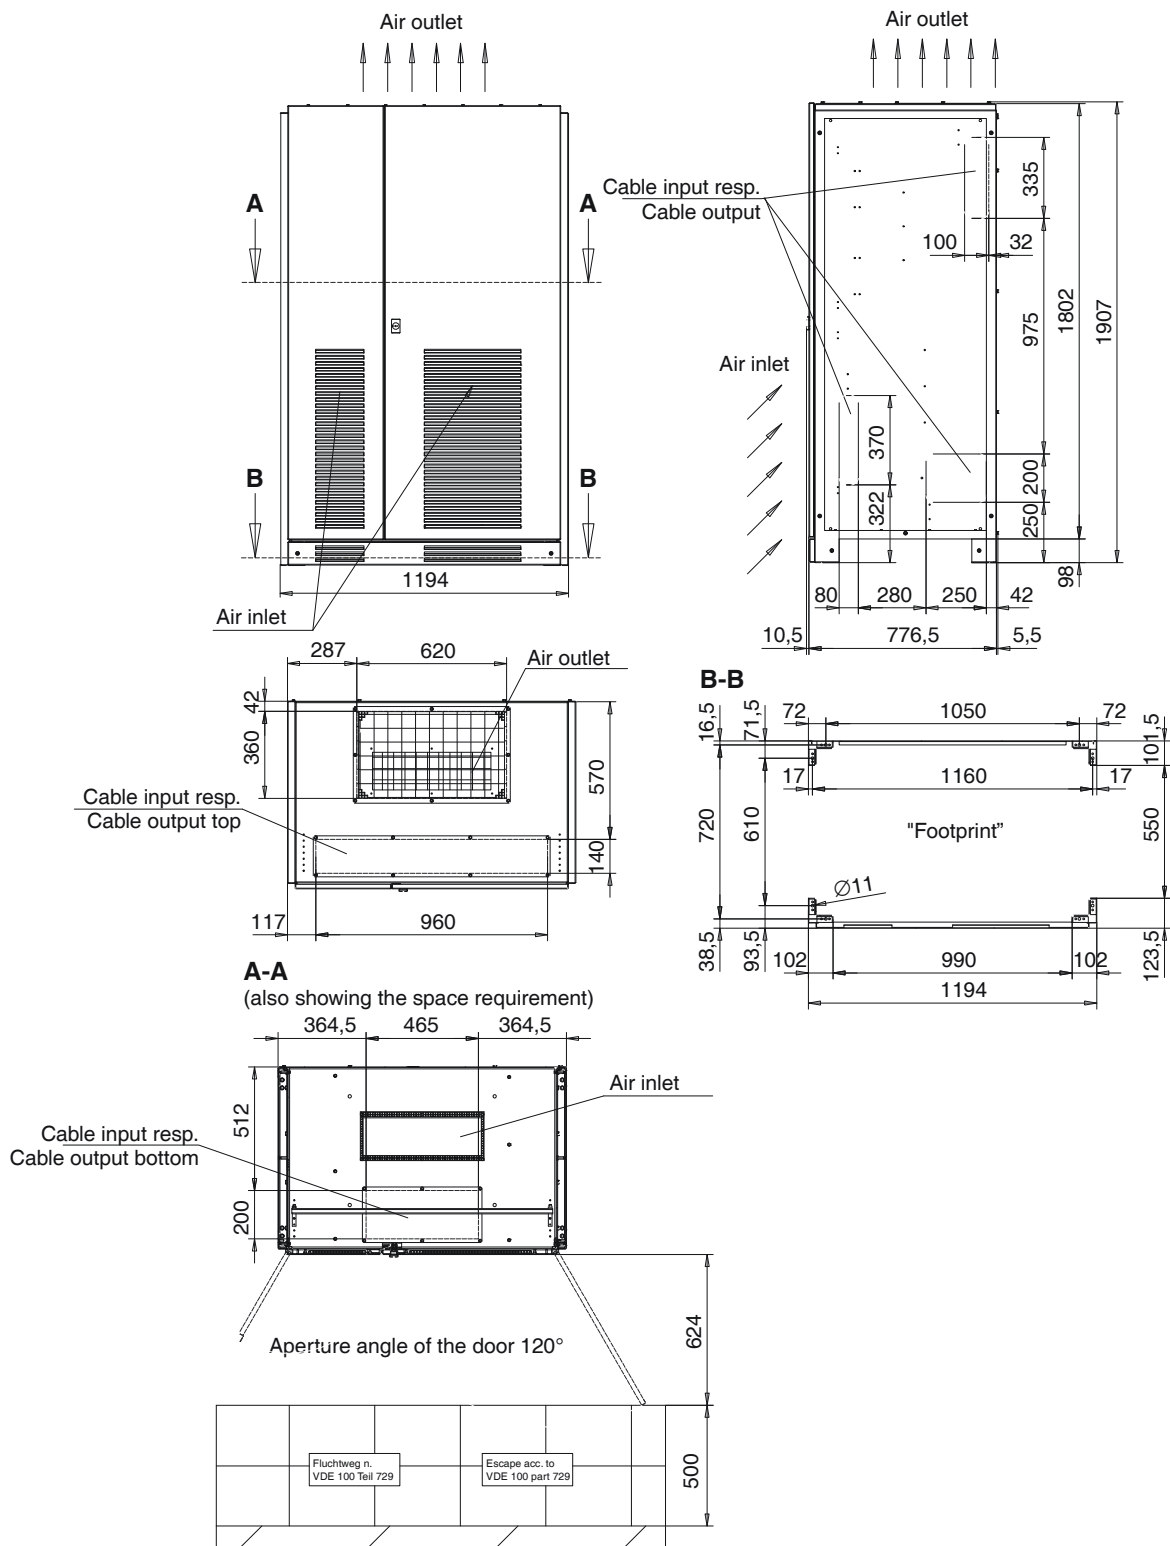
Auxiliary cabinet APOCONV 300-500 kVA dimensions and space requirements
